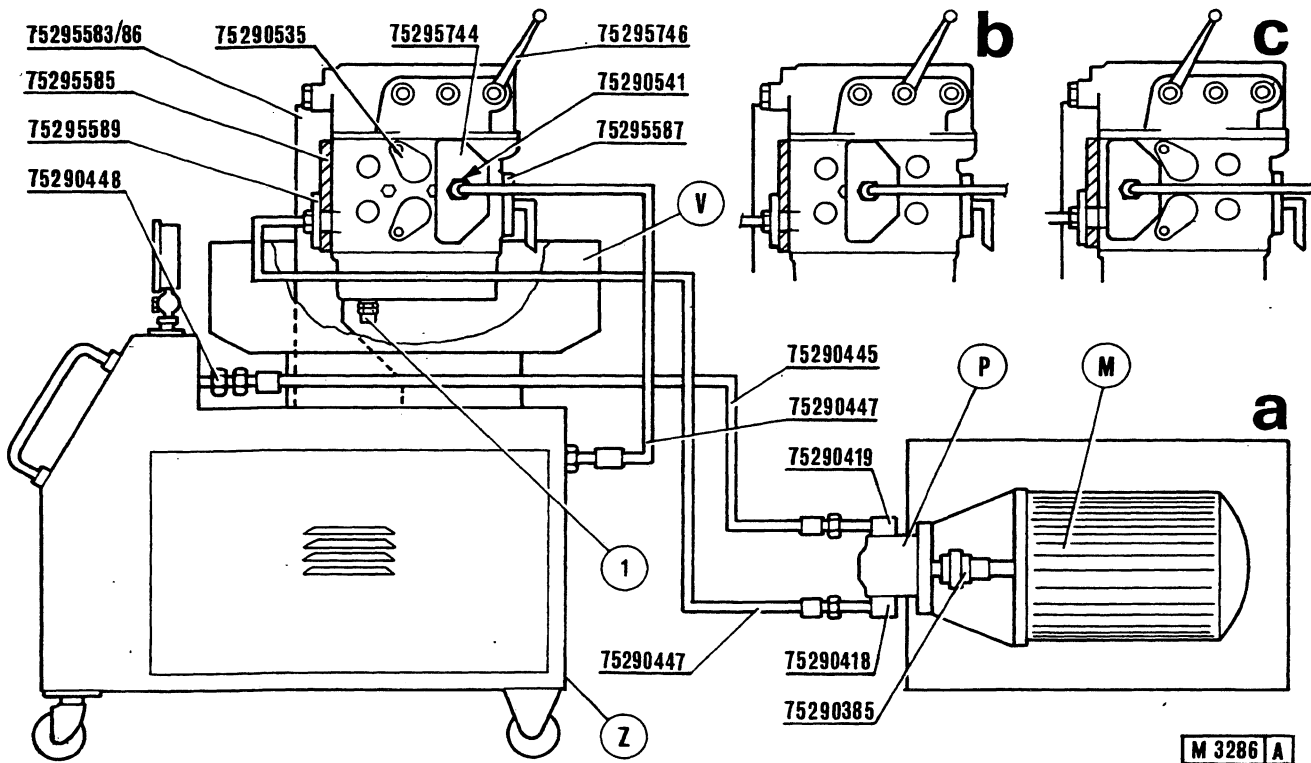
Schematic set-up for main control valve fluid test on bench.
